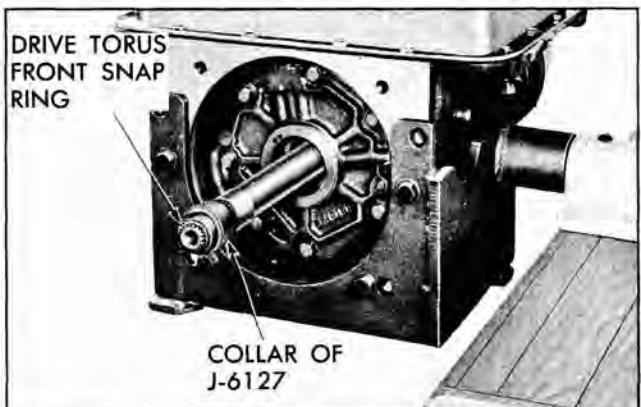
Collar of Fixture J-6127 in Place Over Intermediate Shaft
